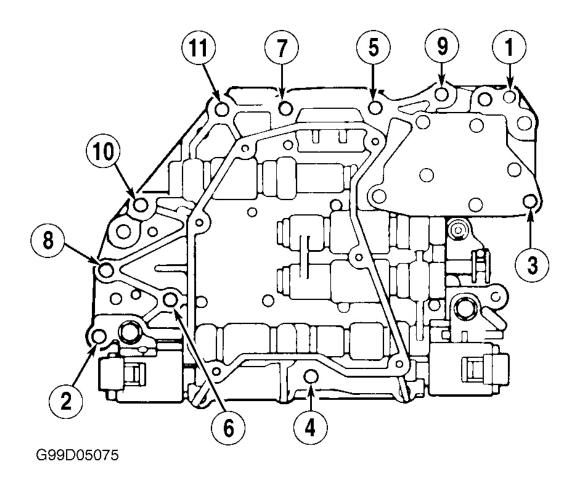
Valve Body Bolt Tightening Sequence Courtesy of SUZUKI OF AMERICA, CORP.
